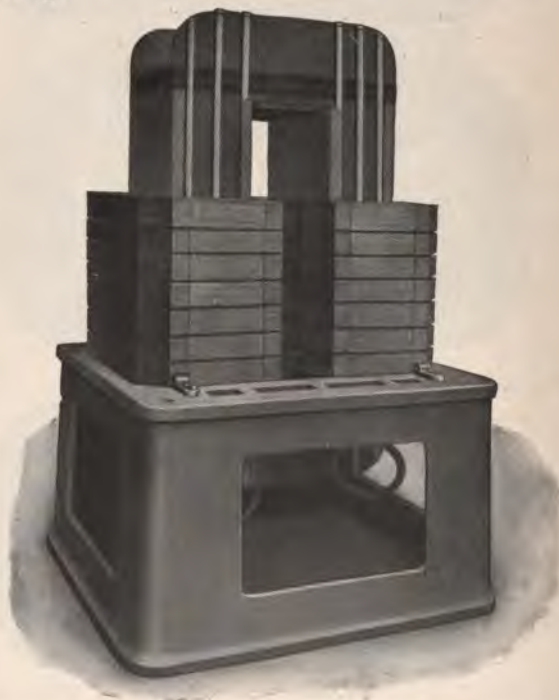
This Cut Shows how the Coils of a Transformer are First Assembled and Then the Core Built up around Them.
